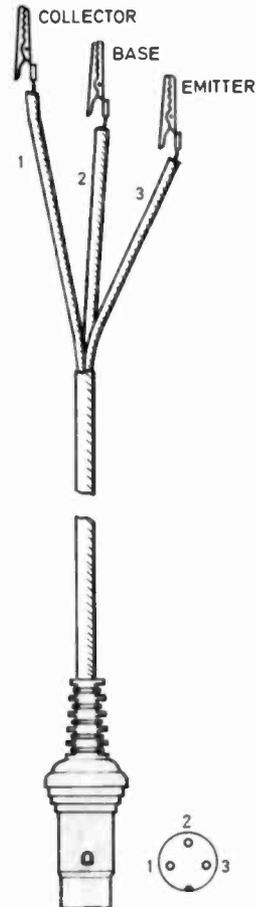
Test lead for in-situ testing using three-core cable, subminiature crocodile clips and a three-pin DIN plug.
